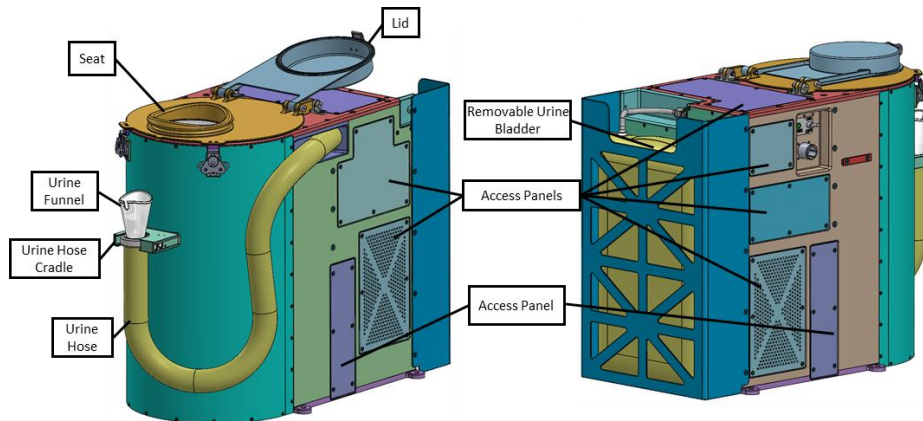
LOO Toilet Assembly preliminary CAD model showing exterior features including primary crew interfaces.
